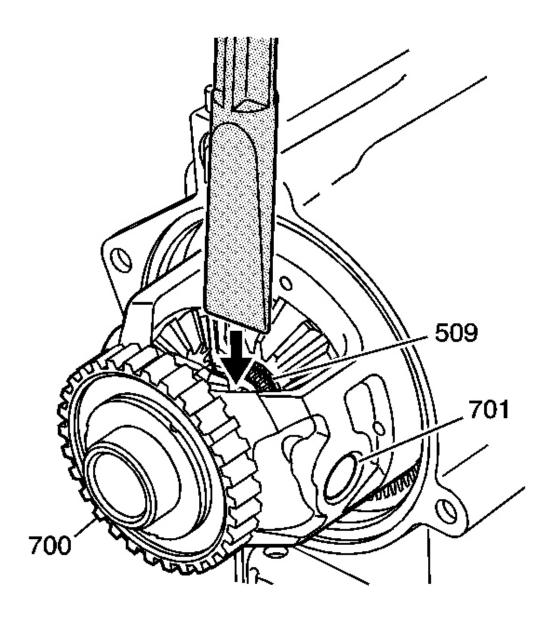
View Of Compression Ring, Pinion Shaft And Speed Sensor Trigger Courtesy of GENERAL MOTORS CORP.
